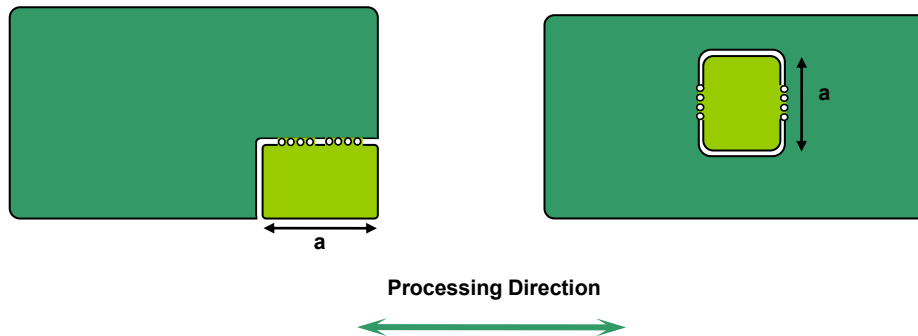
Stamp hole placement for filler pieces greater than 50mm in length, where 'a' is the length of the filler piece.
